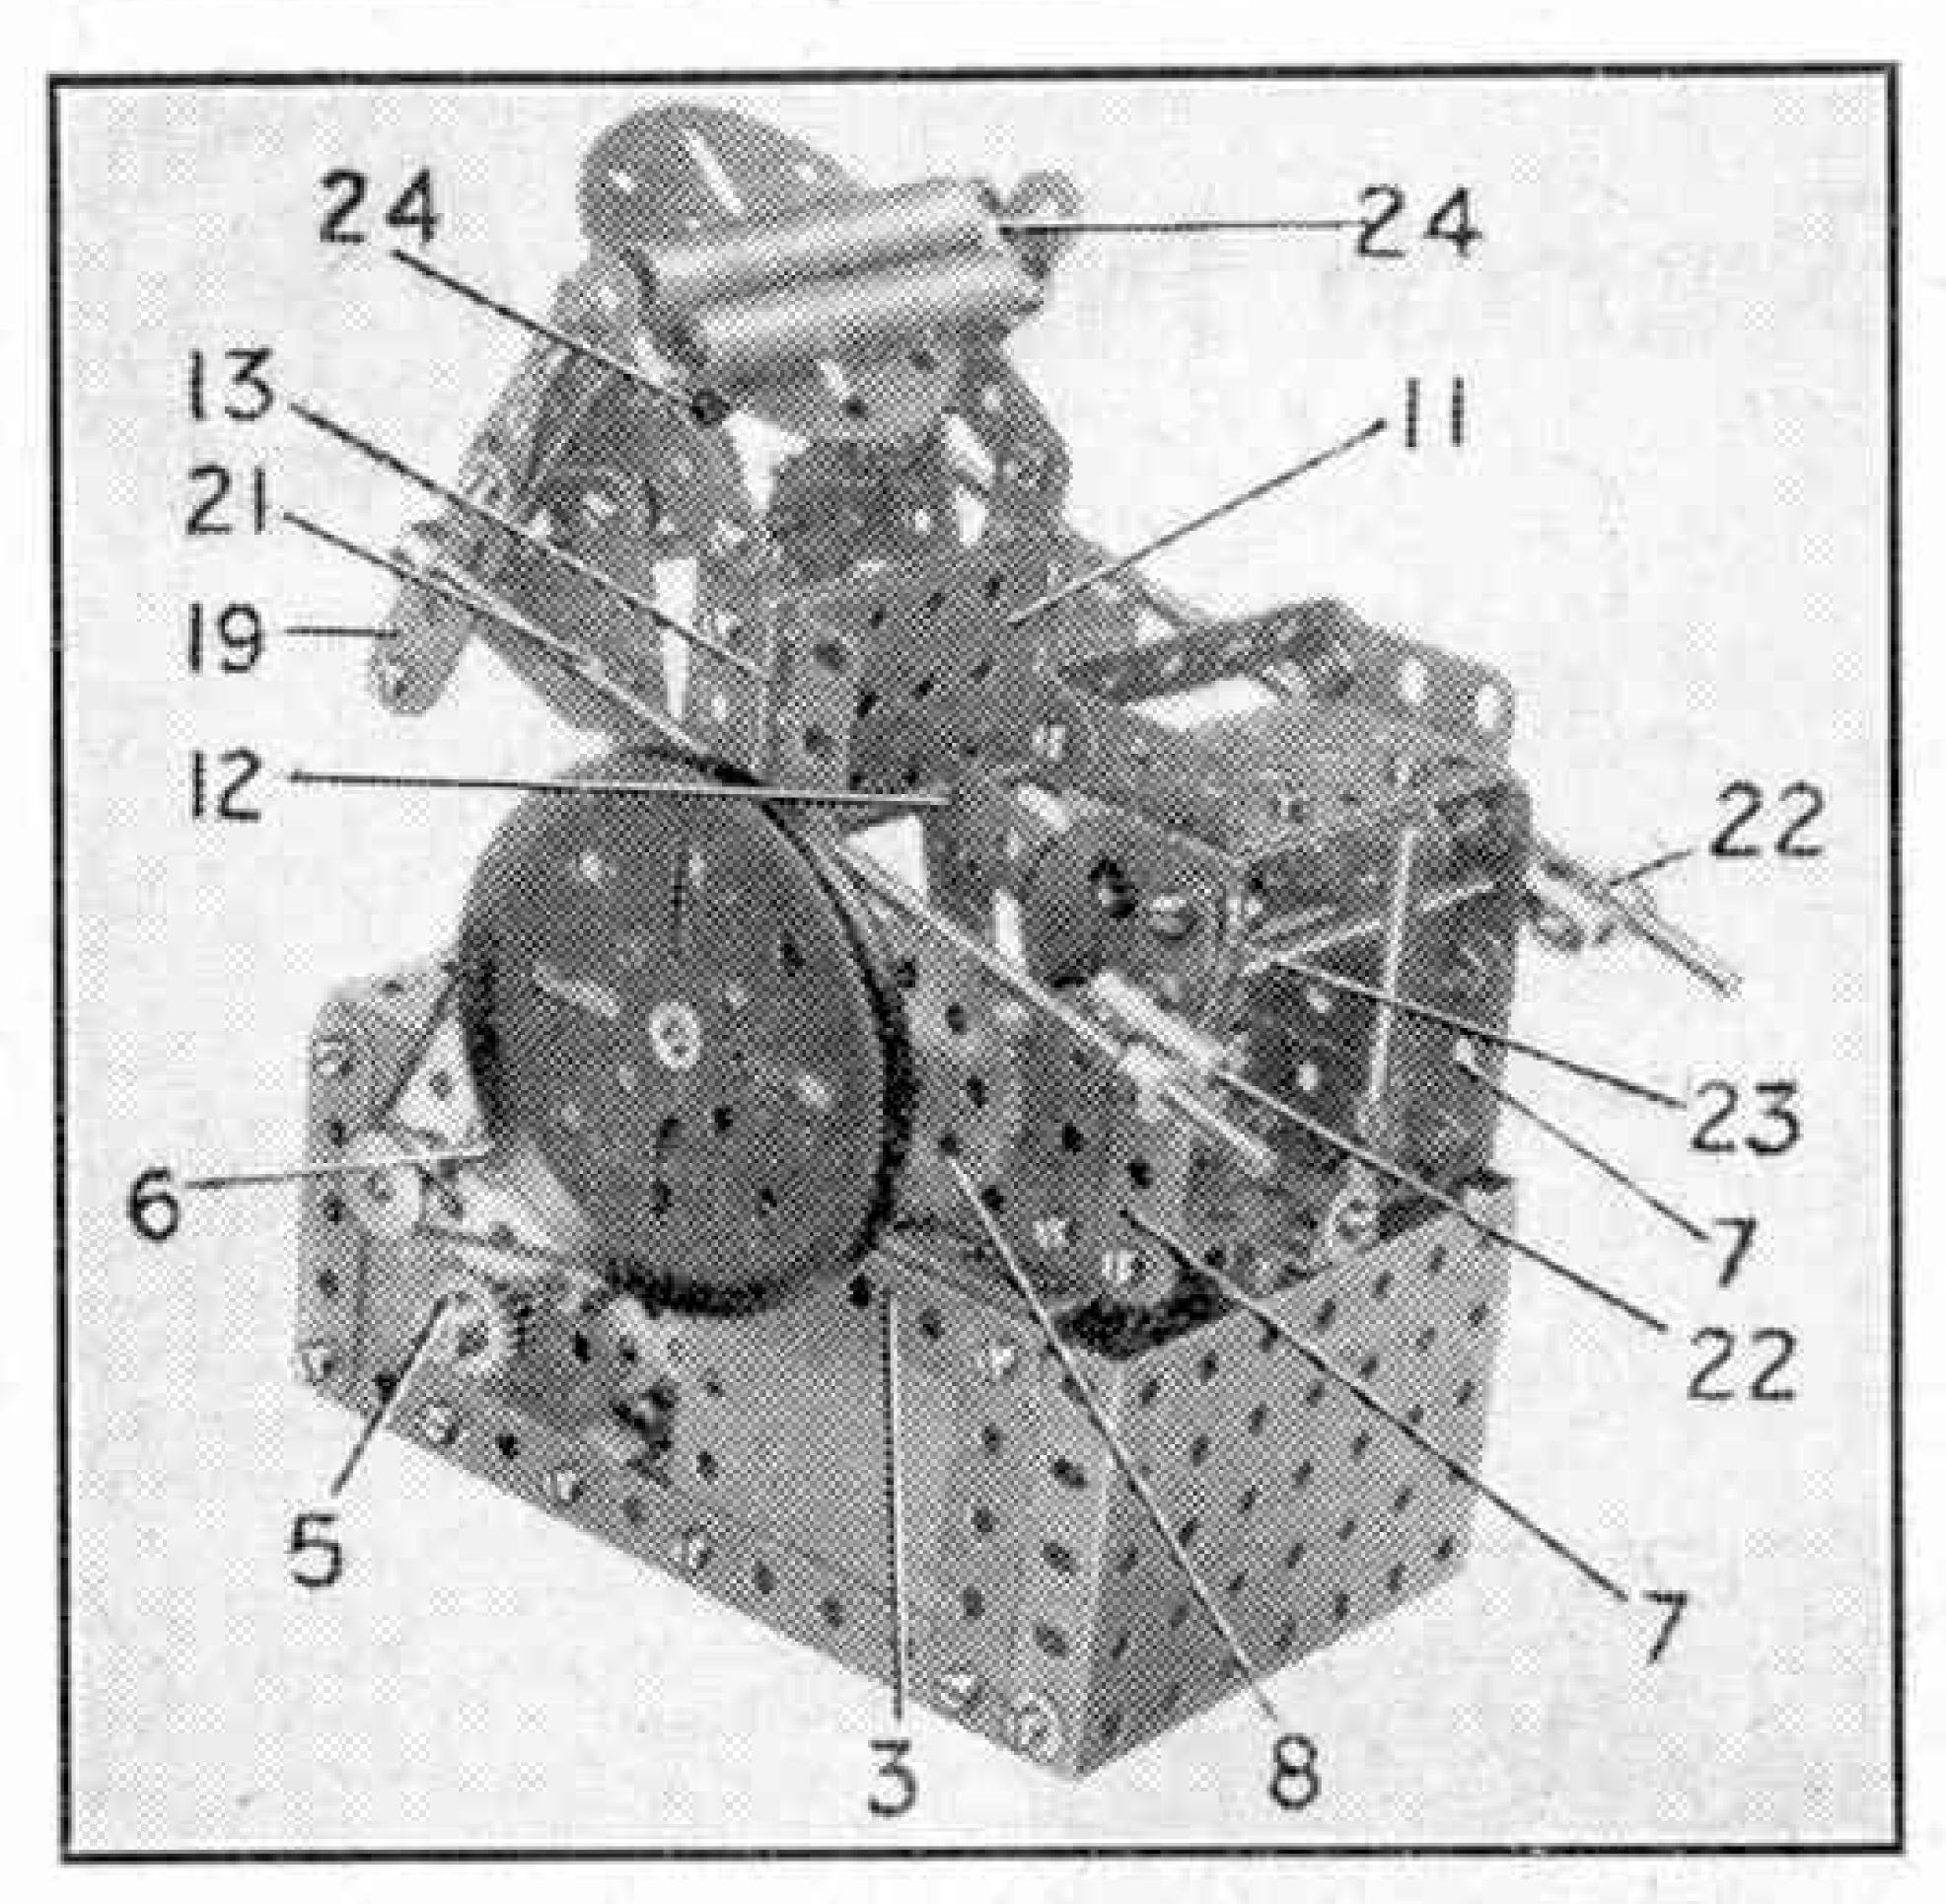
A side view of the machine showing the belt drive to the flywheel. Here the platen is in the printing position and the rollers are over the inking plate.
